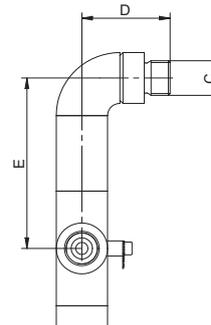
Outlet with threaded pin suitable for devices with union nuts
